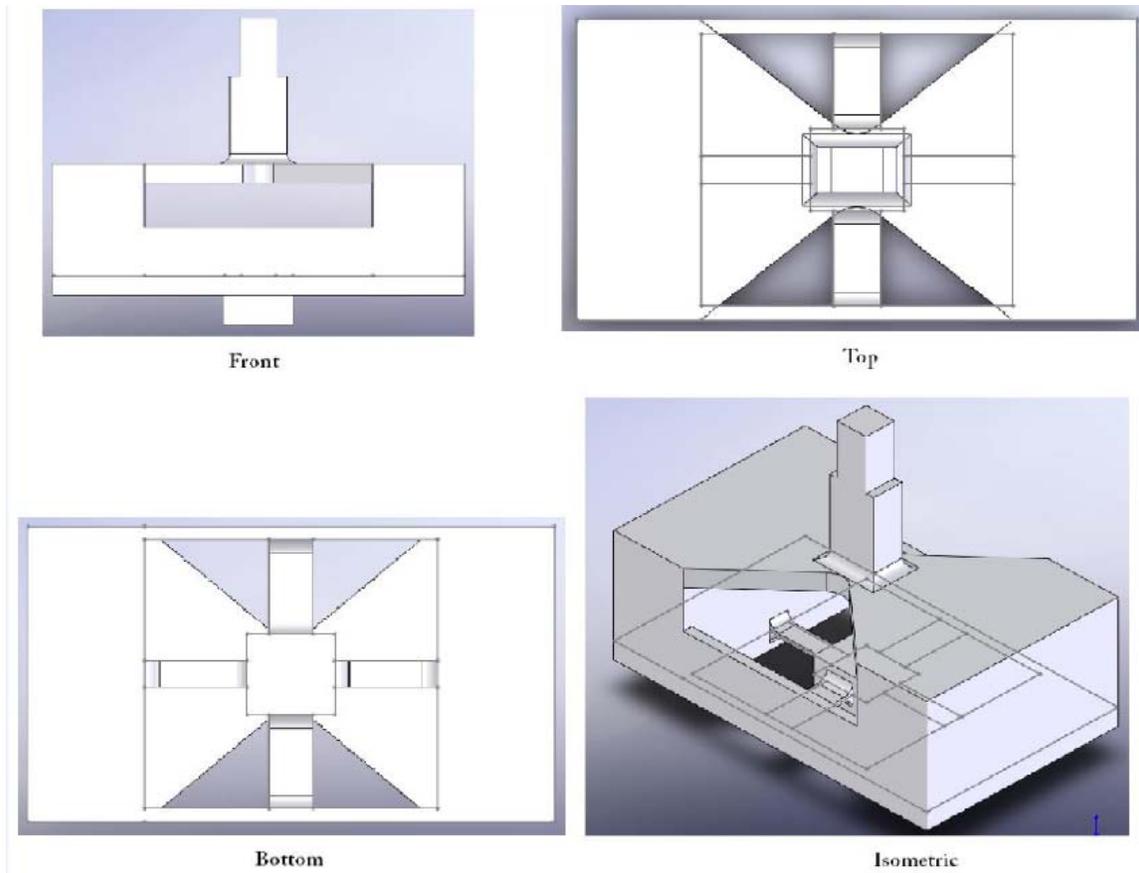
Shows the CAD drawing of four different views of the final compliant suspension design.
